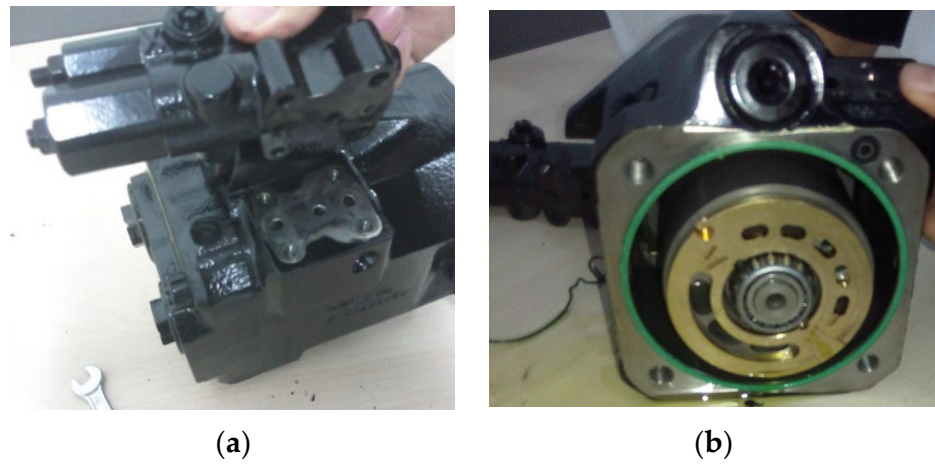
10-plunger pump prototype. (a) Physical structure; (b) Disassembly drawing.
